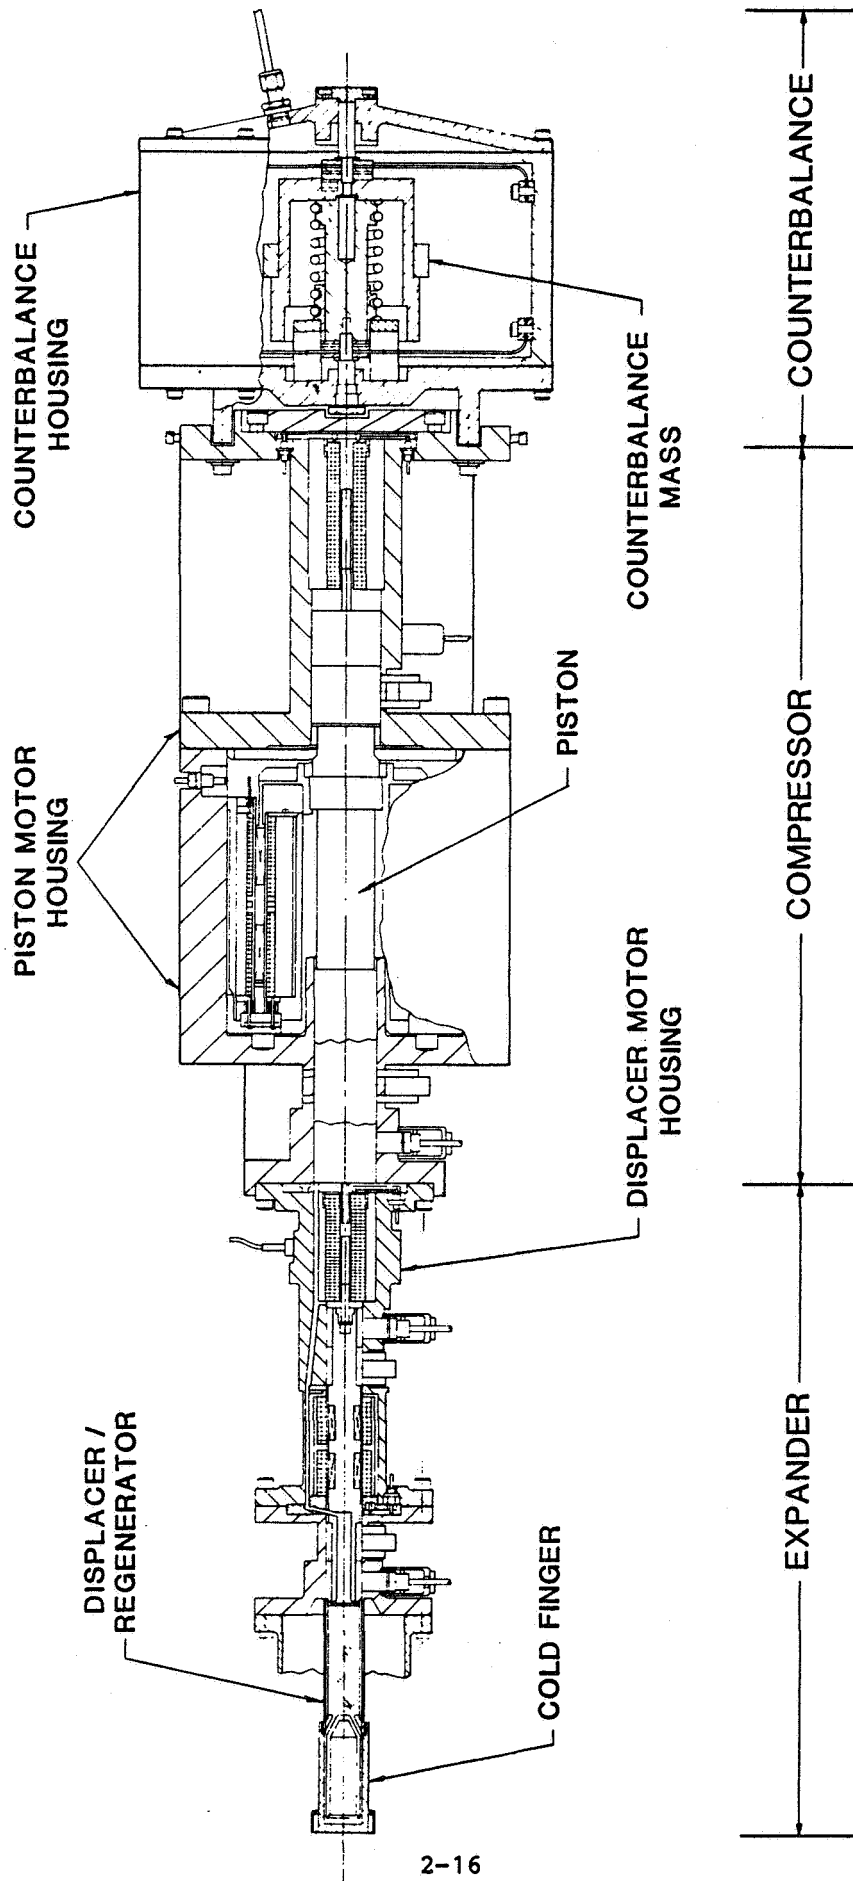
Cross-sectional view of Engineering Model Cooler.
